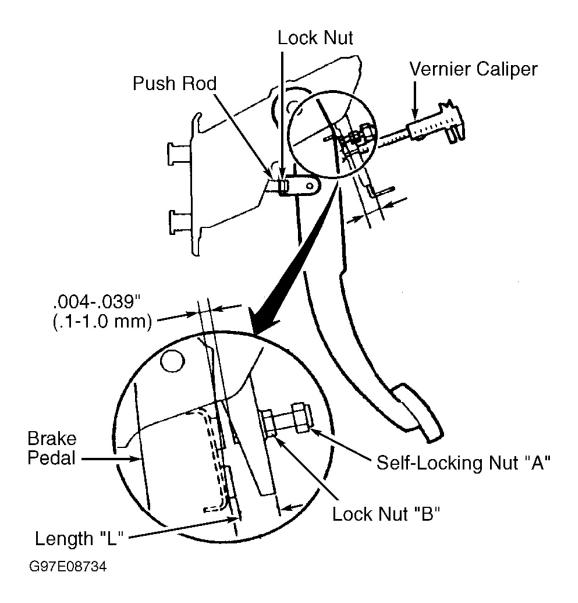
Adjusting Brake Pedal Height (Millenia Shown; Protege Is Similar) Courtesy of MAZDA MOTORS CORP.
